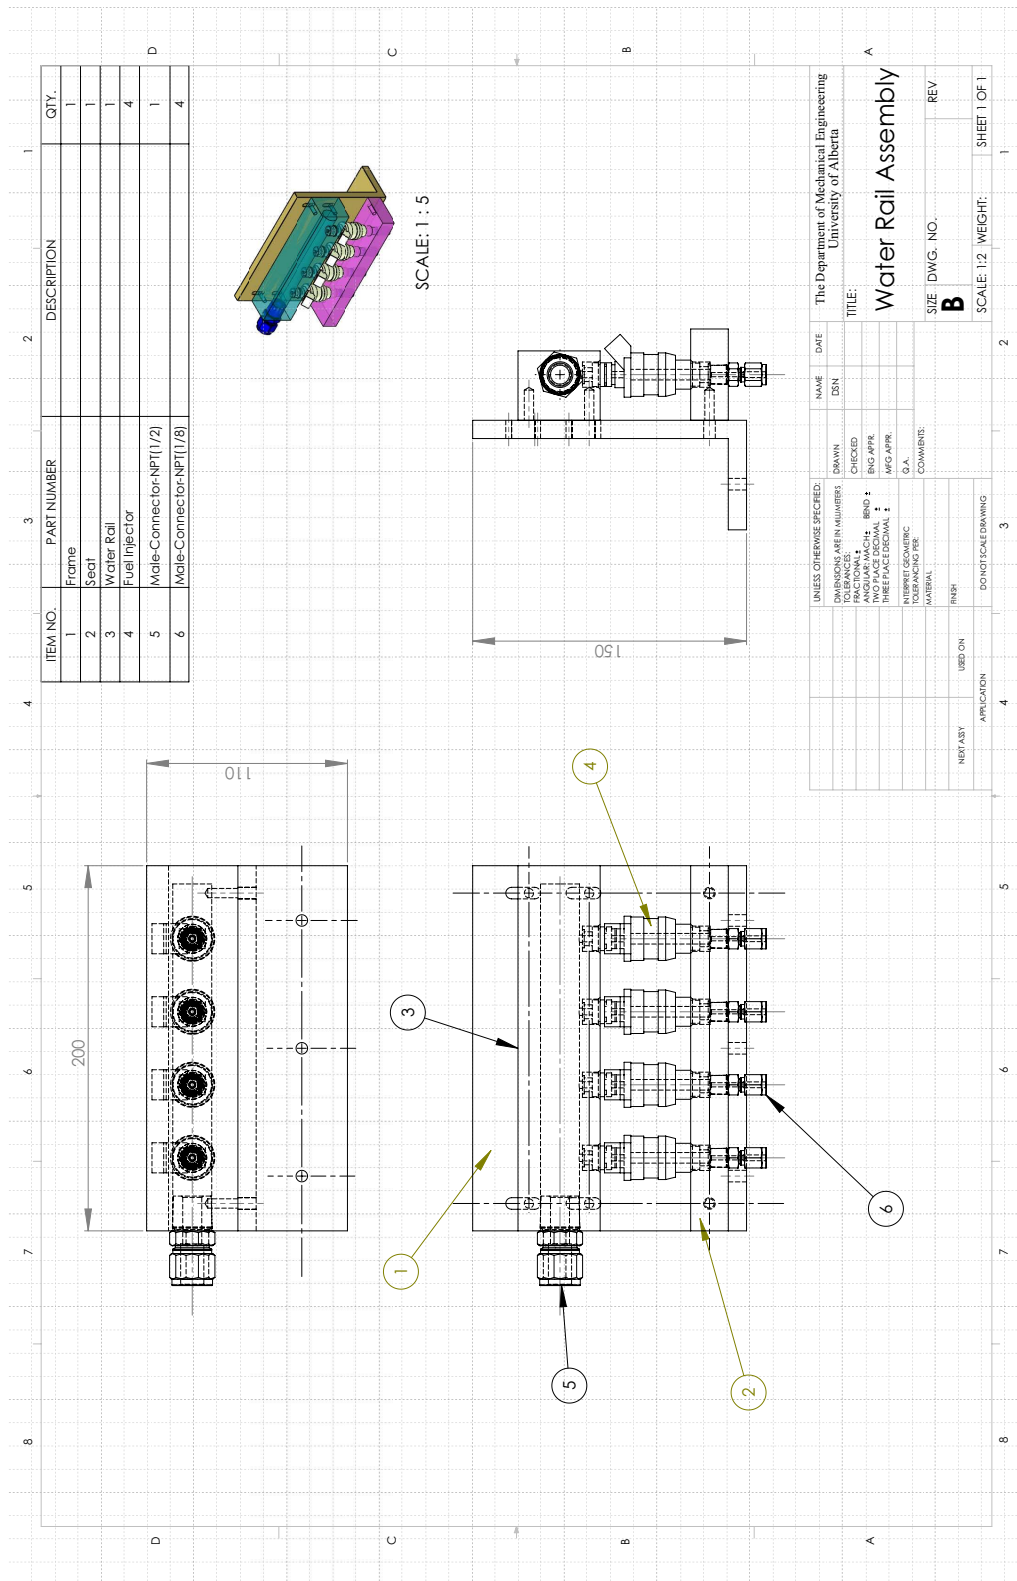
Drawing, Water rail assembly for injectors feeding.
